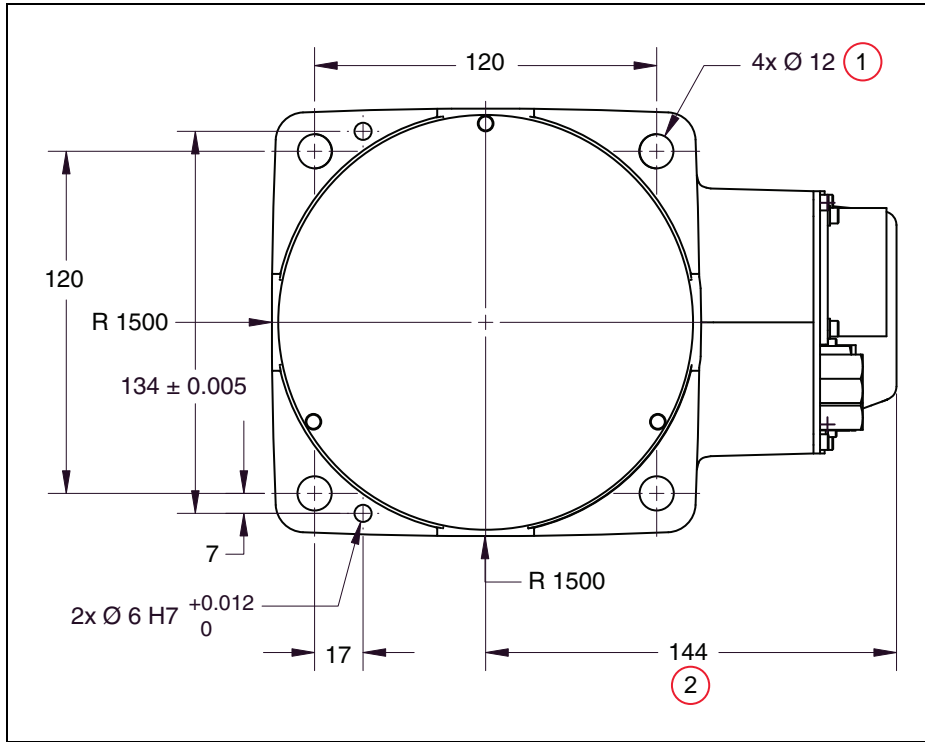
Robot Base Mounting Hole Pattern (Units in mm)
